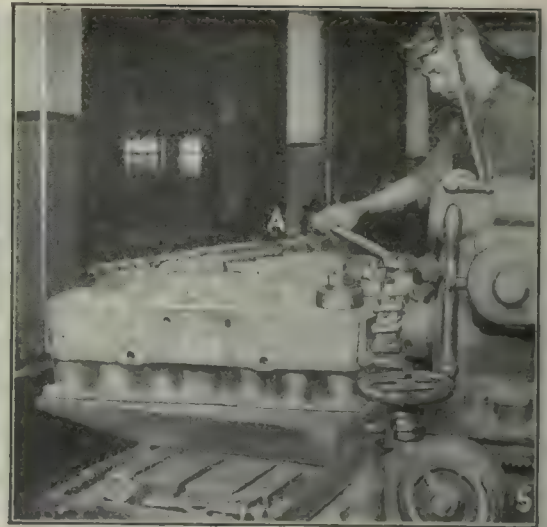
MILLING THE ENDS OF THE CYLINDERS
